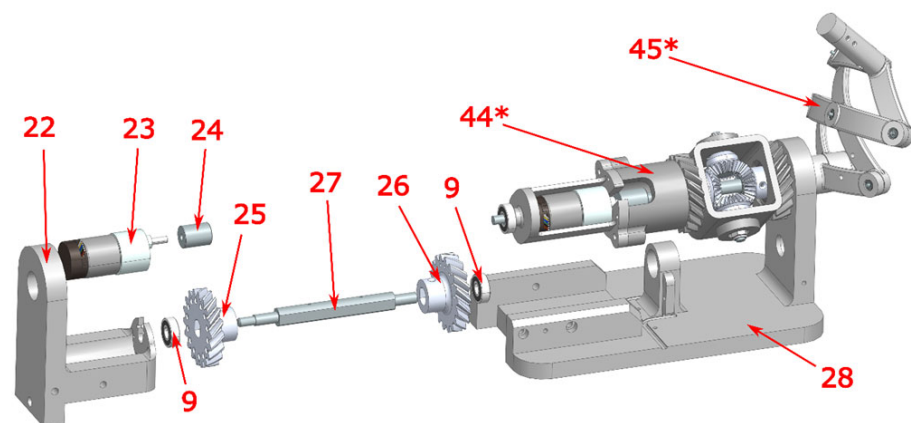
Elements of the robot structure, showing the contra-rotating gearbox, the helical gear pair driving the q_1 rotation, the base frame and the placement of the two main actuators.
